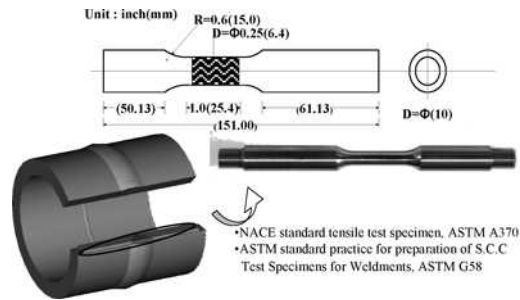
Location of cutting in the specimen from the welded pipe and the configuration of the SSCC test specimen.
